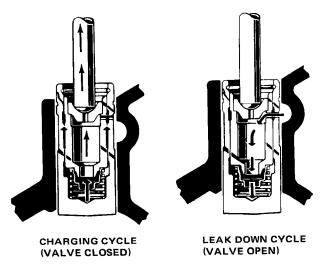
B-16 Typical Hydraulic Tappet Assembly
